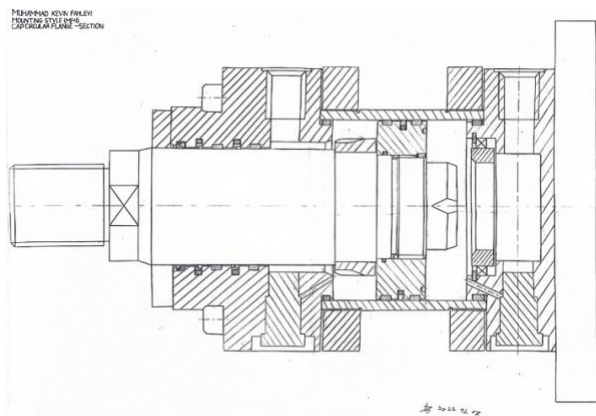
Constructed Drawing of the MF4 Hydraulic Cylinder in the section perspective
